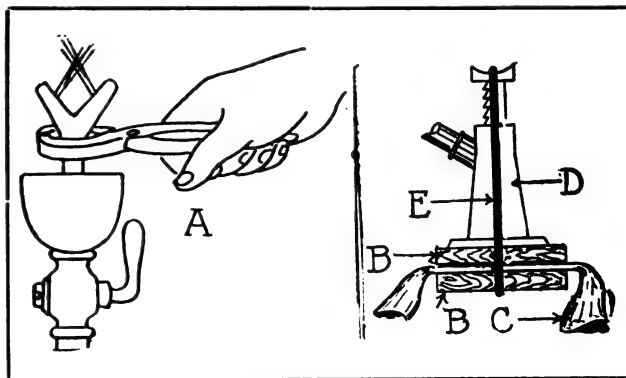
A, Cleaning Acetylene Burner at Compression Relief Cock; B, C, D and E, Members of Improved Tire Tube Press.
